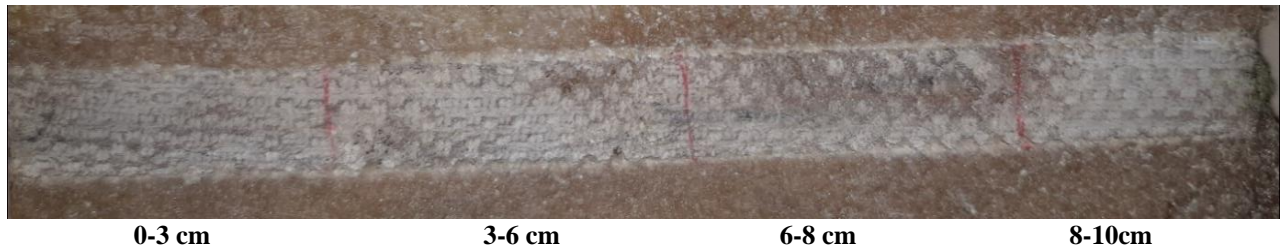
Photograph of cutting surface using spindle speed of 1300rpm and feed rate of 6 mm/min. The distance is 0-3, 3-6, 6-8, and 8-10 cm from the left end off specimens
